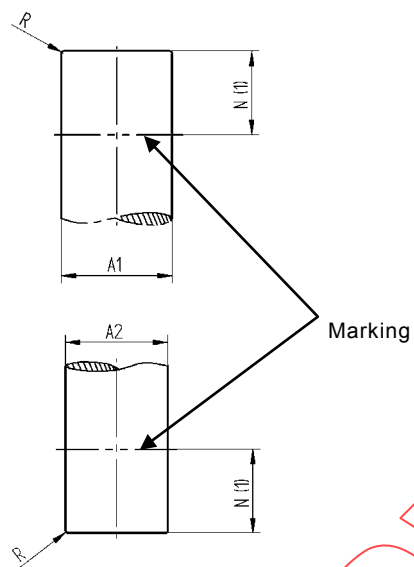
Test cap for the test of Clause 13 for lampholders G28d
